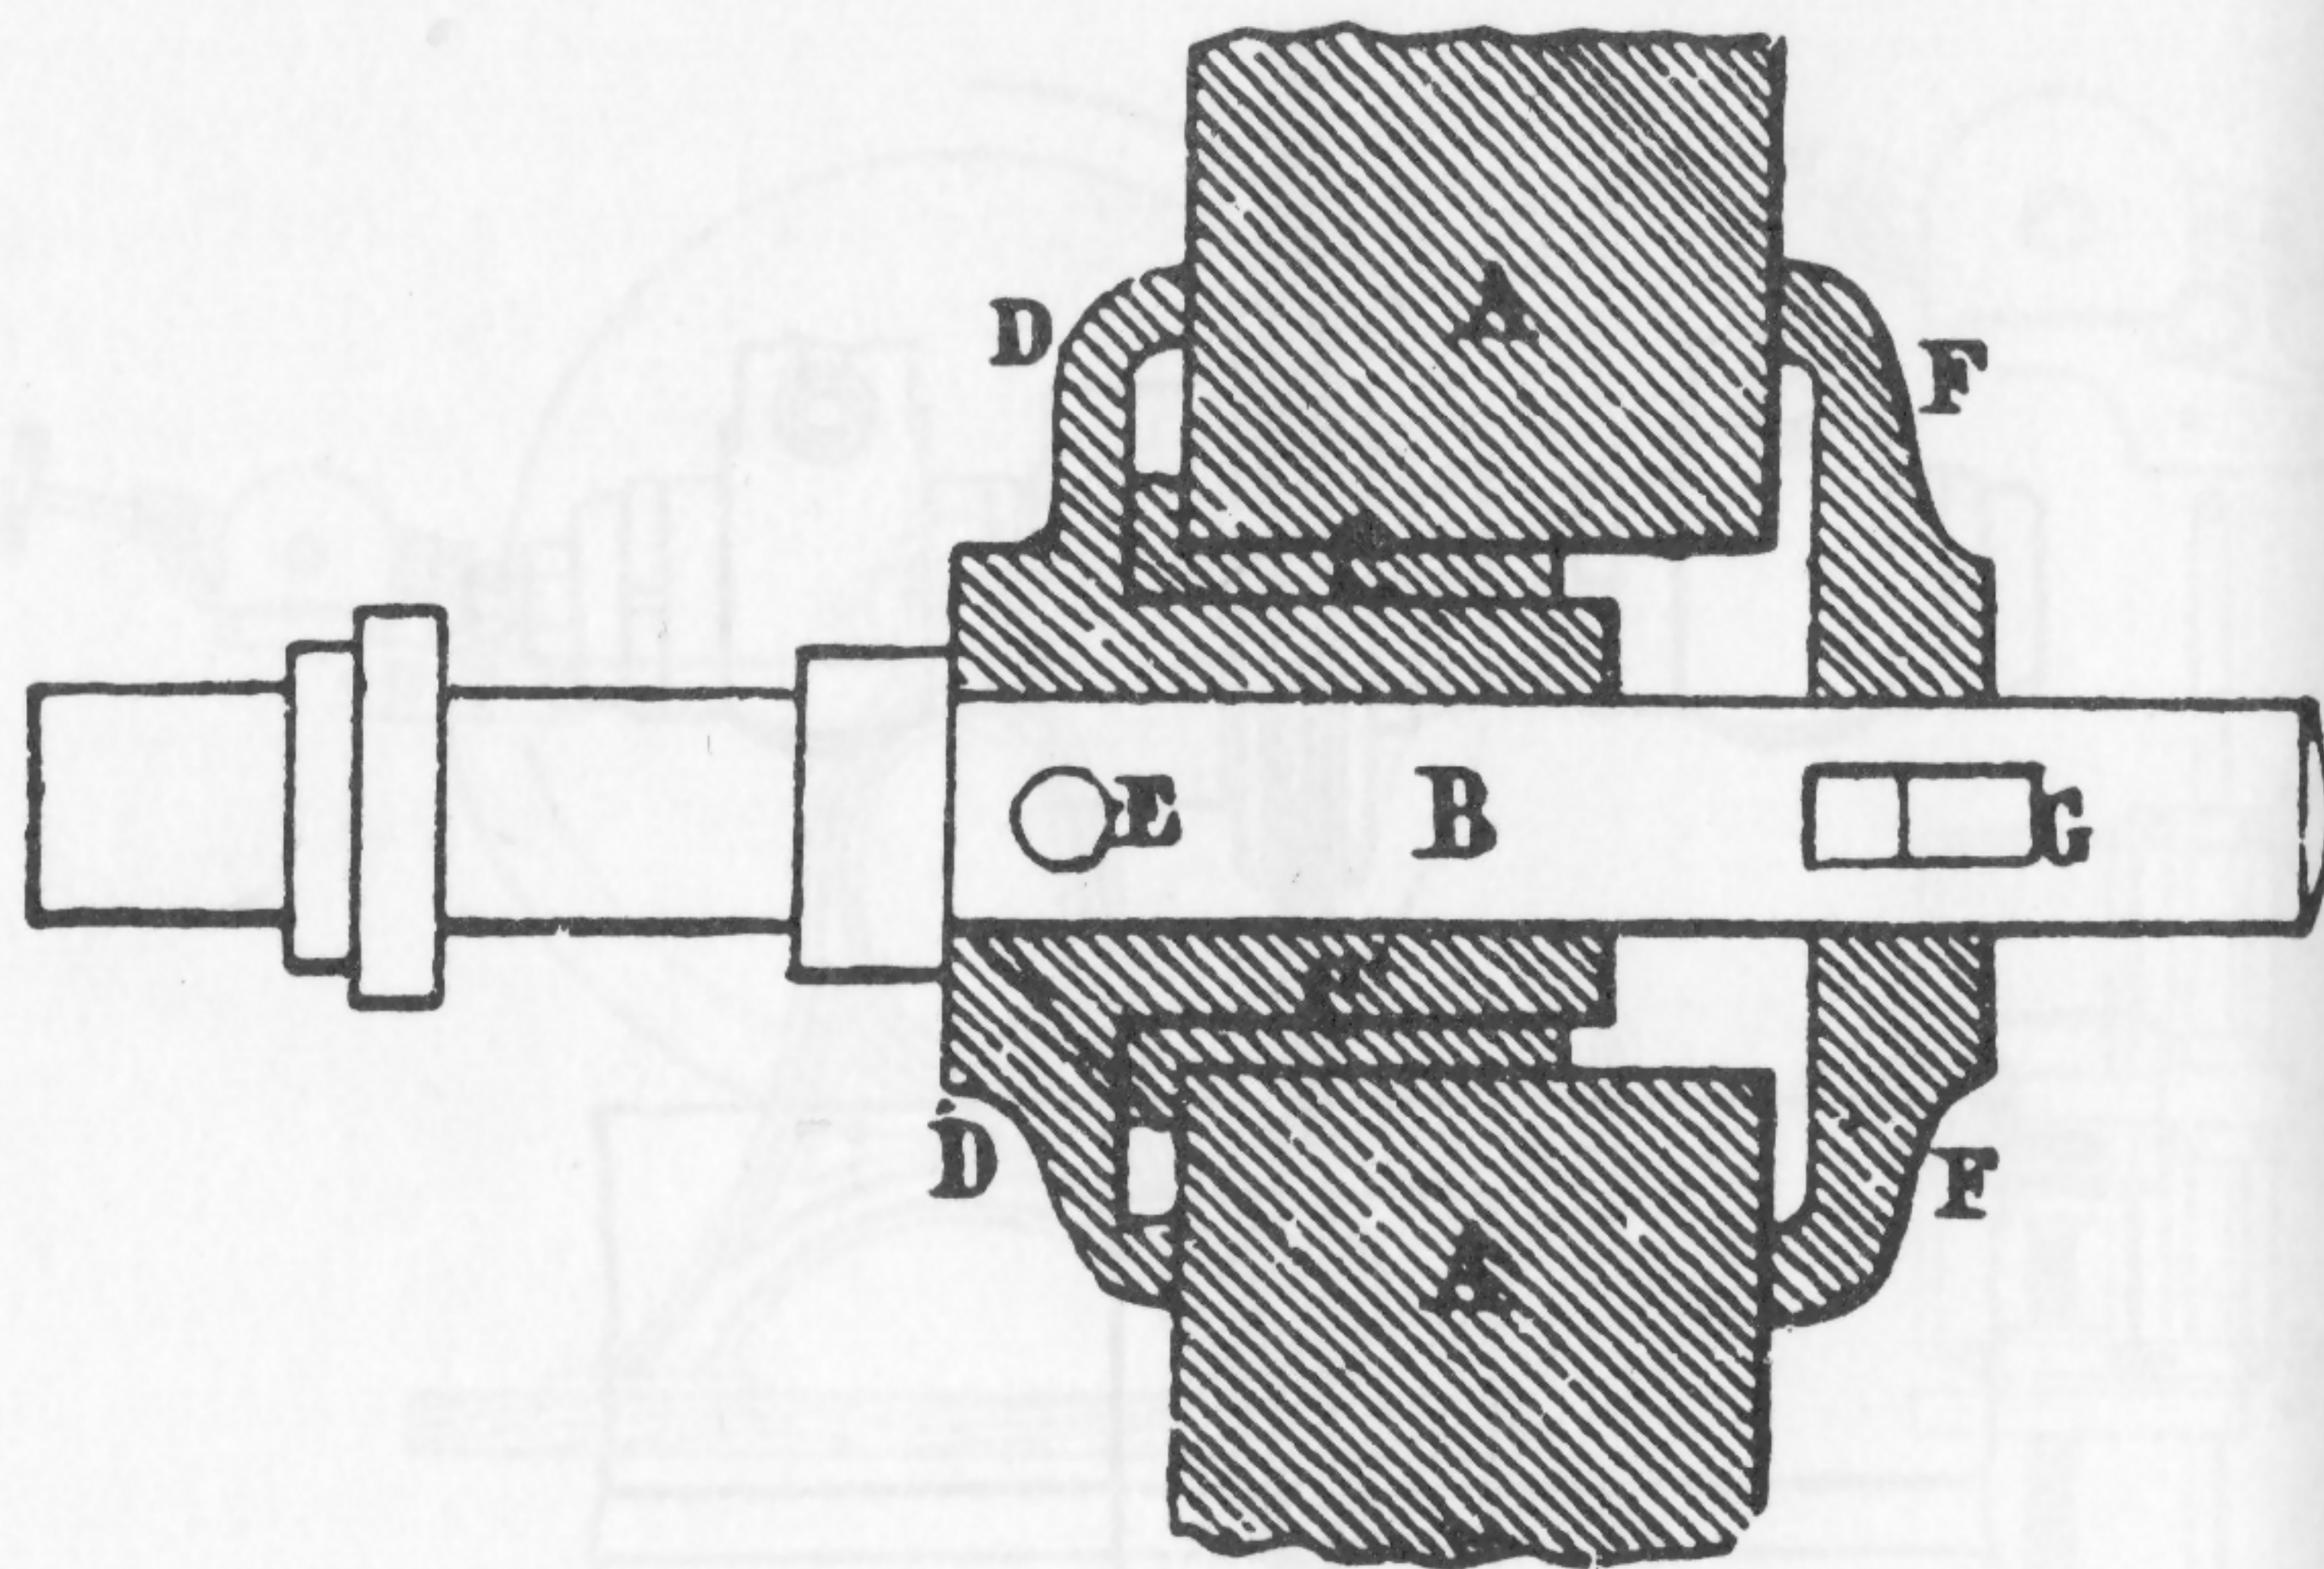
PHILIPP'S WHEEL MOUNTING, 1863 (Schroeder)
